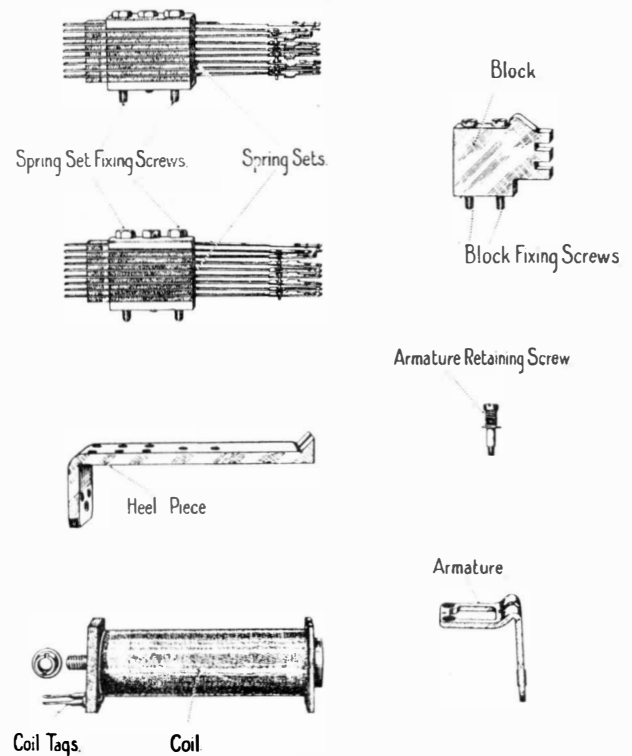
ASSEMBLY DETAILS OF P.O. RELAY.
